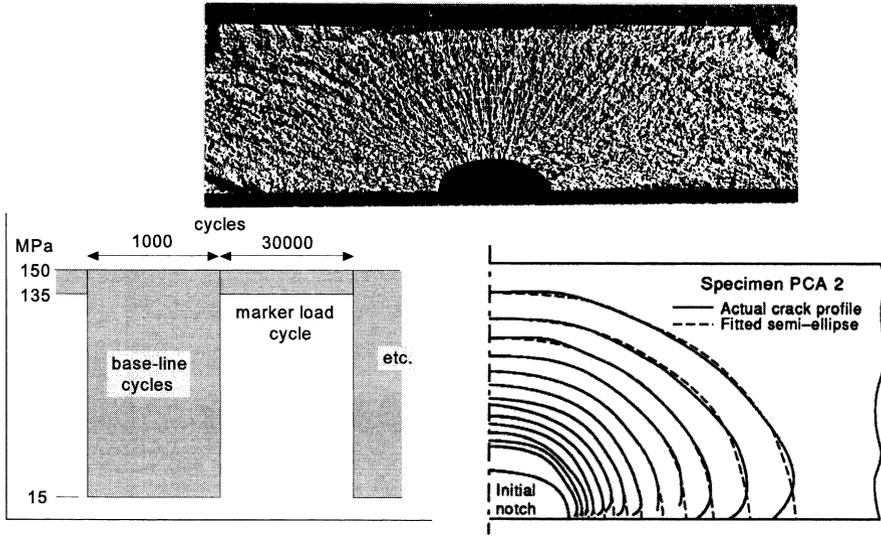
Fractographic analysis of crack front shapes of a surface crack by using marker loads. Plate thickness 9.6 mm, Al-alloy 7075-T6, CA loading [11].
